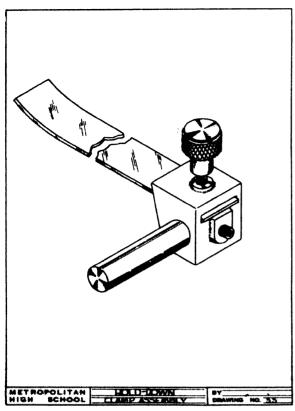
HOLD-DOWN CLAMP ASSEMBLY (PROBLEM)
